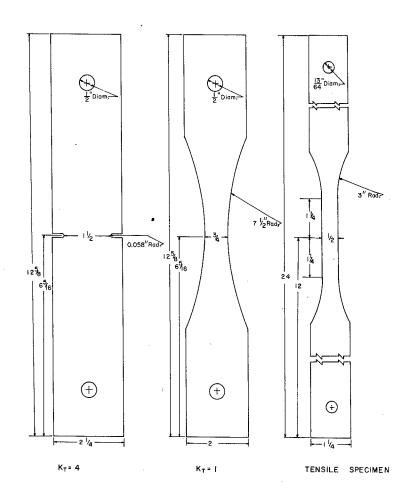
Sheet specimen configuration. All dimensions are in inches unless otherwise noted.
